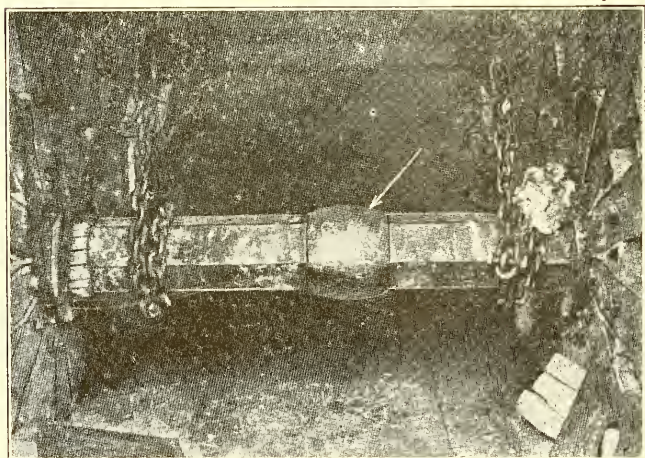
Weld on Wheel Shaft of Steamer "Nashville" on
